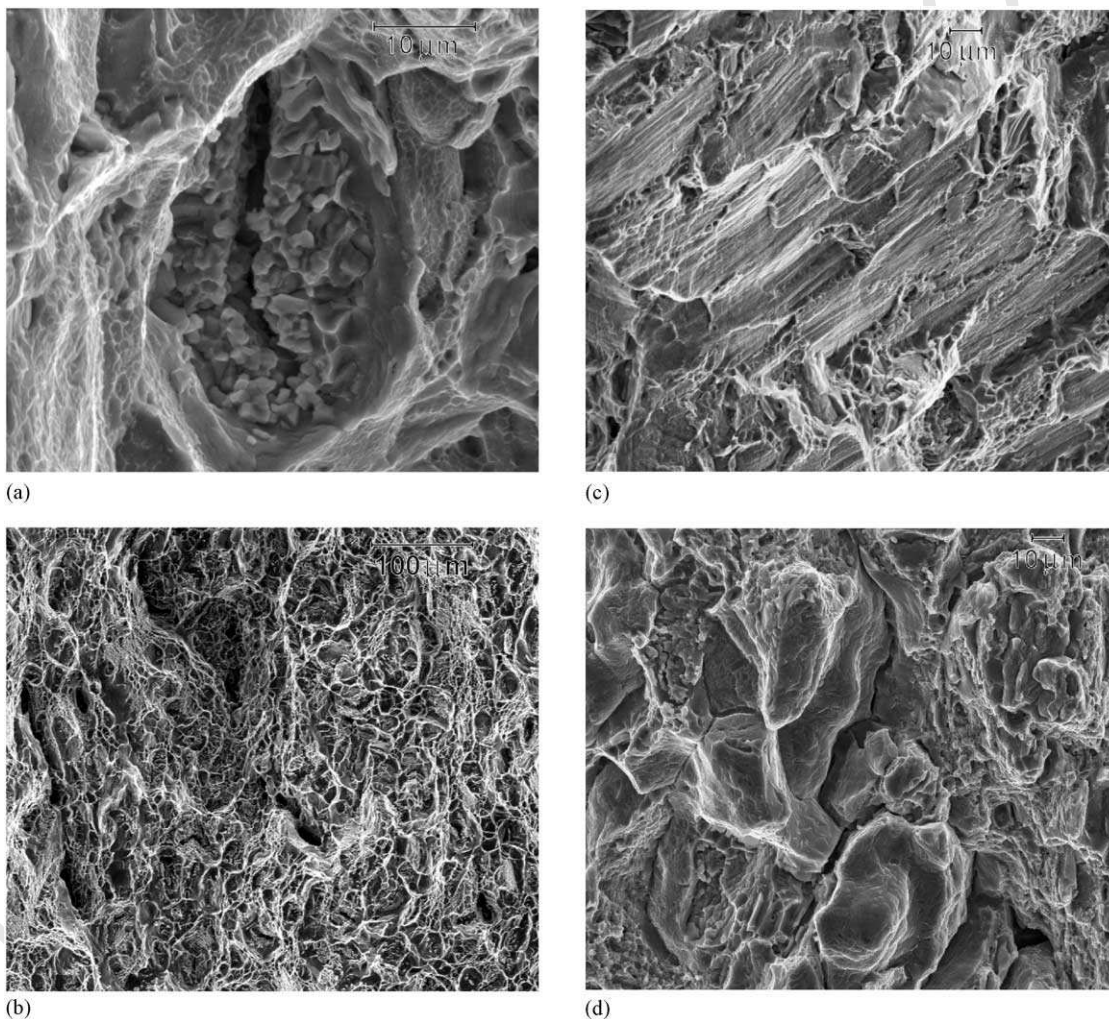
Elementary fracture mechanisms met in the fracture surfaces of Kahn Tear Test specimens. (a) Intermetallic fracture (intermediate quench, under aged); (b) ductile fracture (fast quench, over aged); (c) ductile shear fracture (fast quench, under aged); (d) intergranular fracture (slow quench, peak aged).
